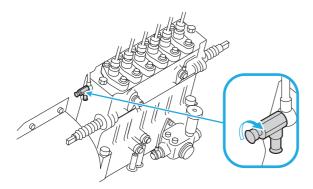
Fuel Injection Pump - Bleed Air 3
